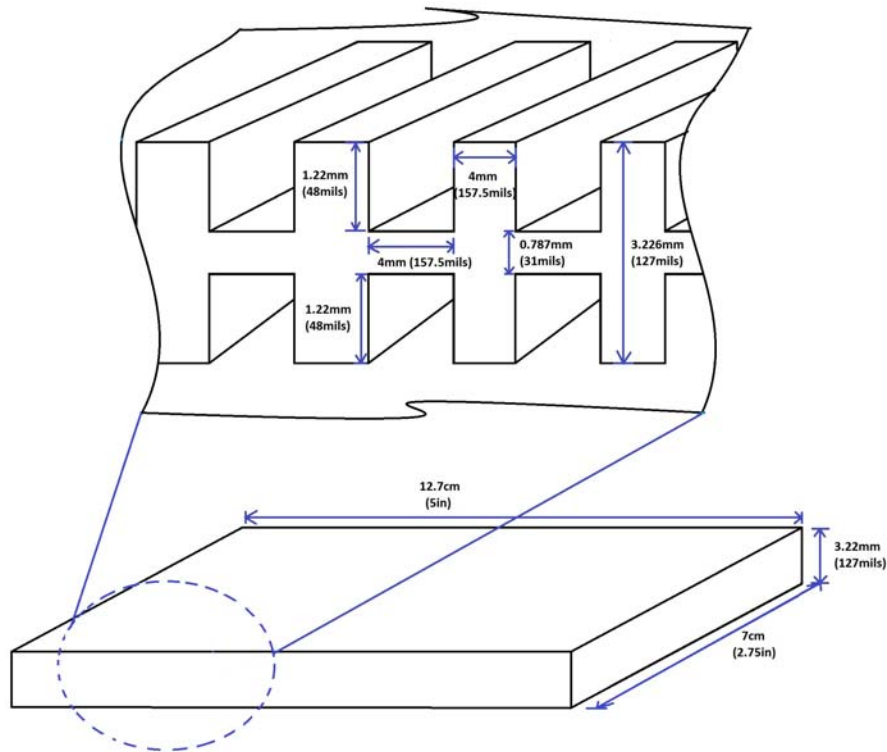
Double Side Etched Nylon Insole Core Dimensions
